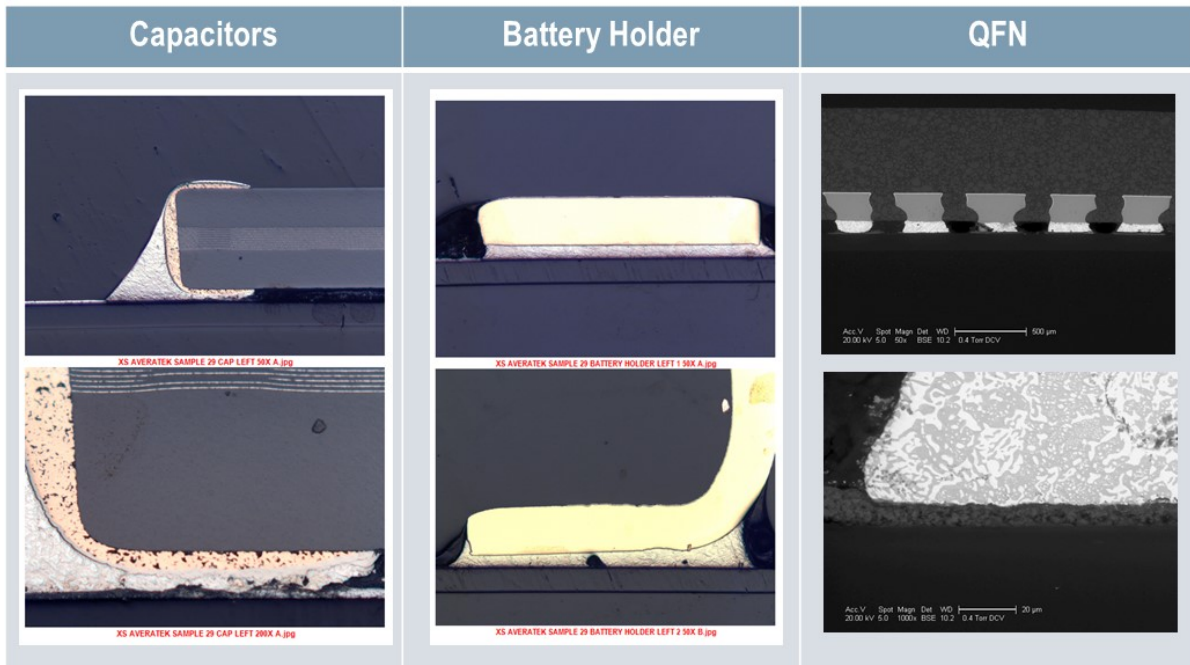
Cross sections of Capacitor, Battery holder and QFN/BTC soldered using Surface Treatment
